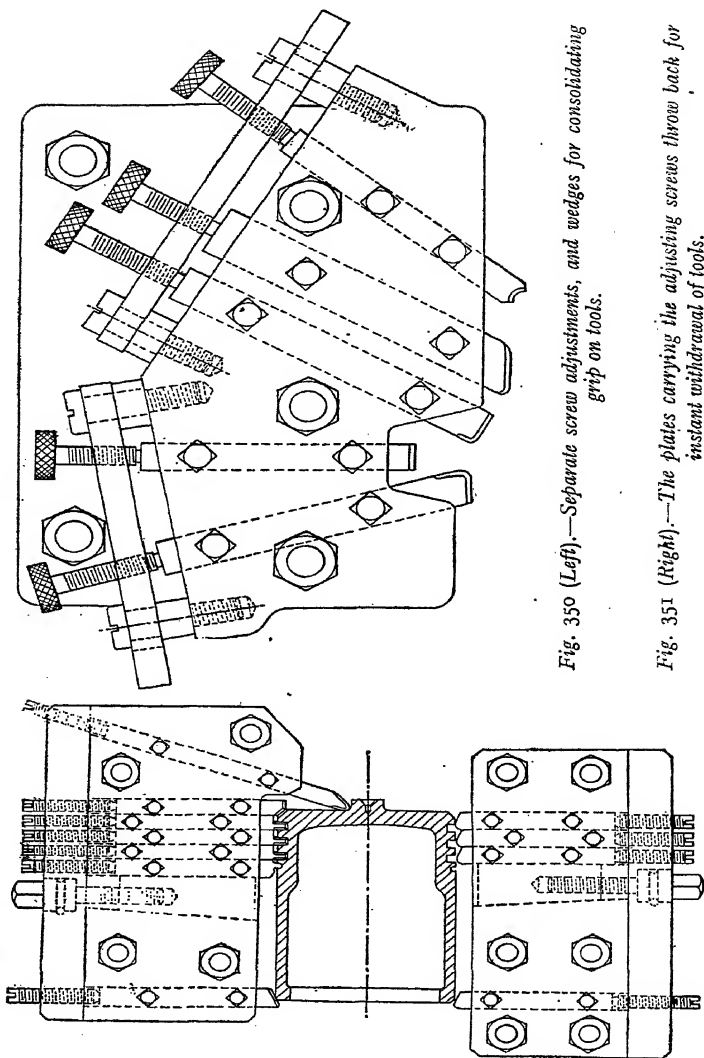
(Left).—Separate screw adjustments, and wedges for consolidating grip on tools.
